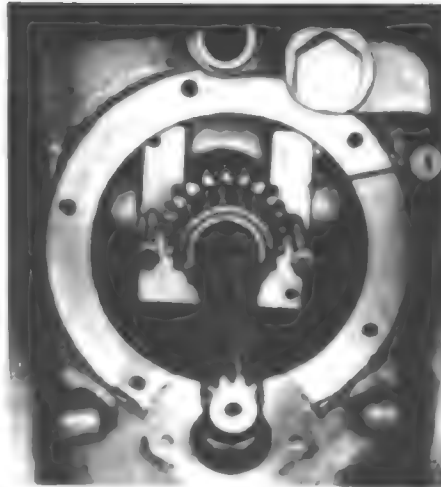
Install horseshoe tool (1) behind pto drive gear and tighten the cap screws against pump swashplate.
